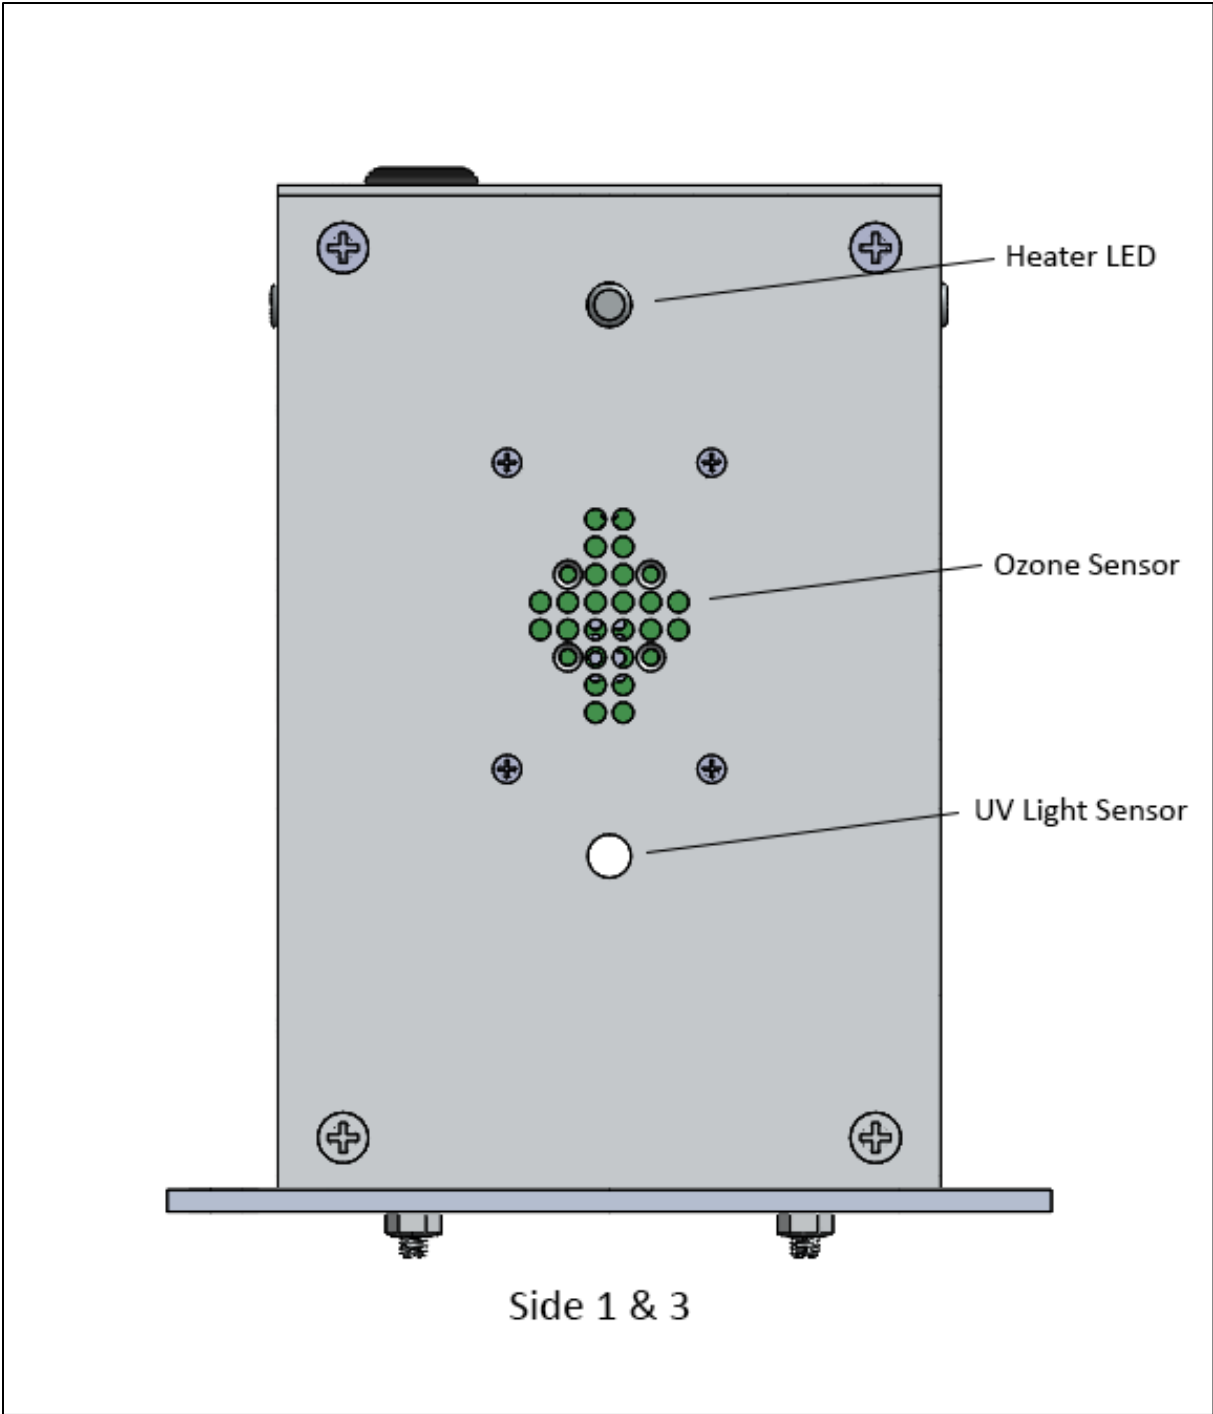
(c) Outer view of design of sides # 1 and 3 of the payload
